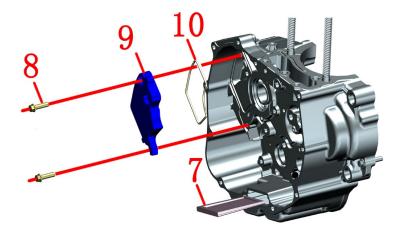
R	IGHT	Right crankcase disassembly 1	СНК
